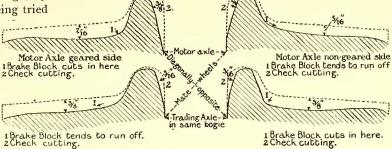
TIRES OF DOUBLE TRUCK EQUIPPED WITH ONE MOTOR
